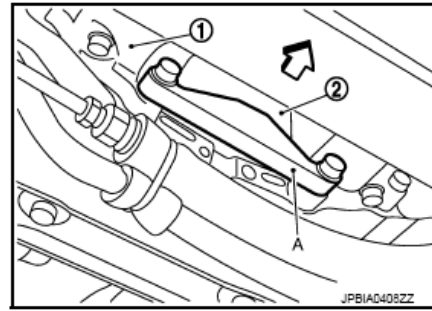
Identifying Oil Pan (Upper) And Drive Plate
